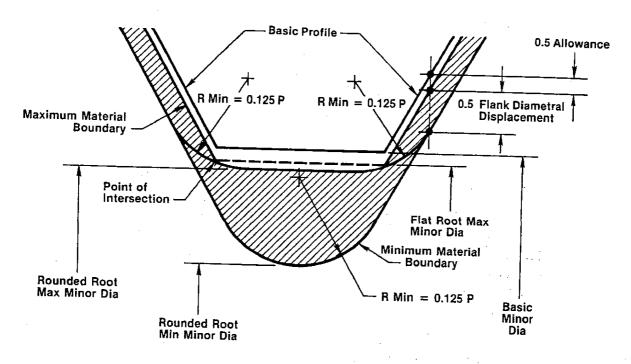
ROUNDED ROOT PROFILES — EXTERNAL THREADS
